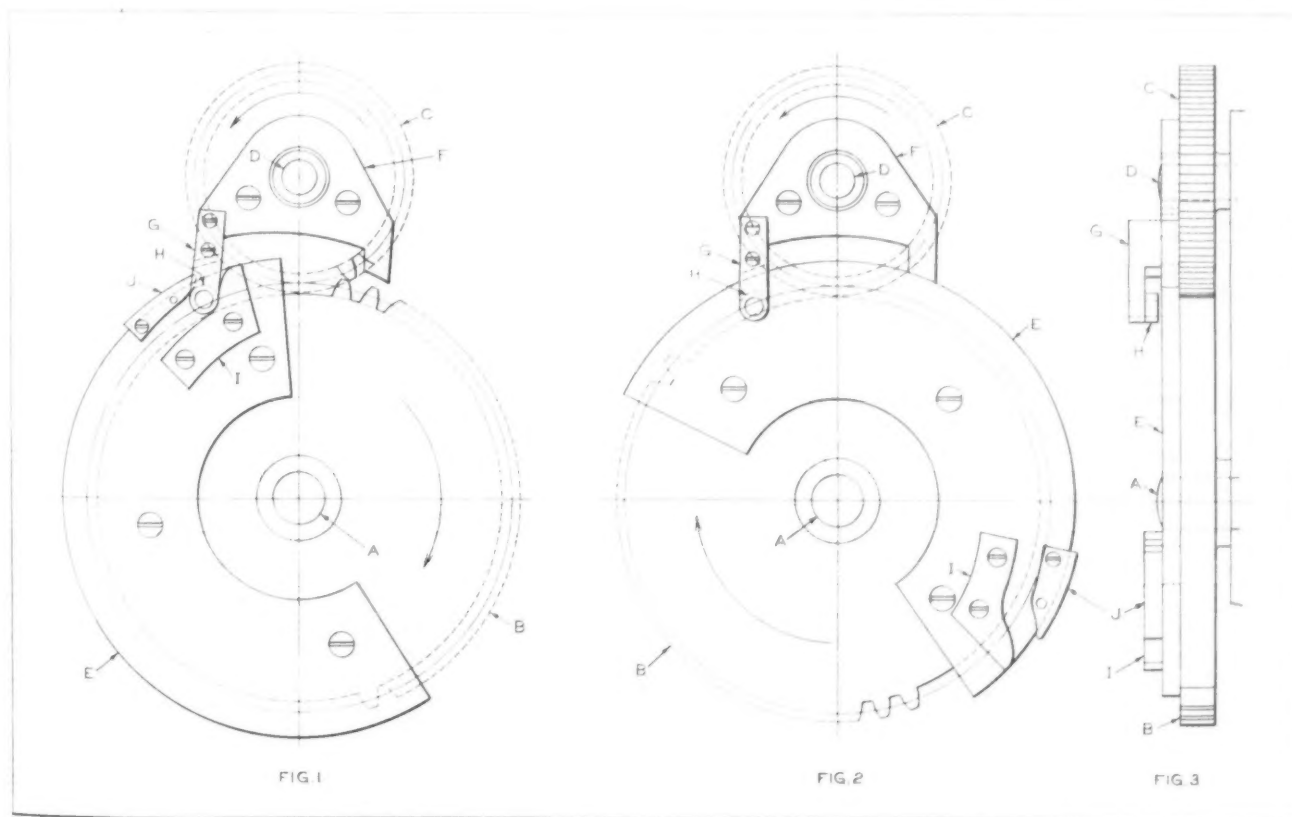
Intermittent Rotating Mechanism with Driven Gear *C* about to Begin Dwell Period.
